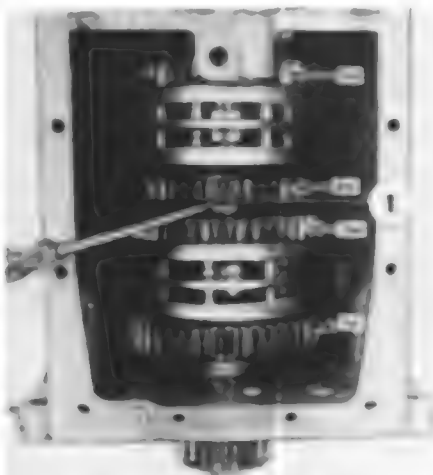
View of clutch fork and release bearing sleeve carrier.
